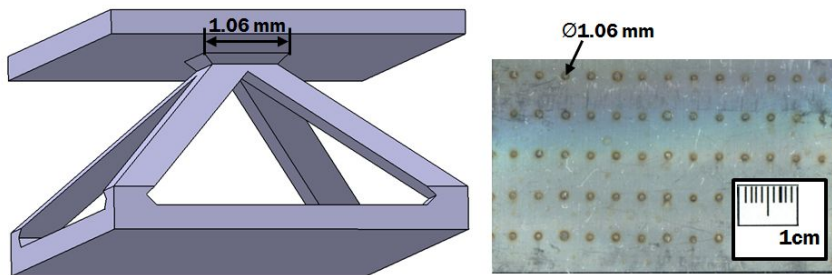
The welding modeling through actual measurement of the weld zone imperfections on the impact specimen
